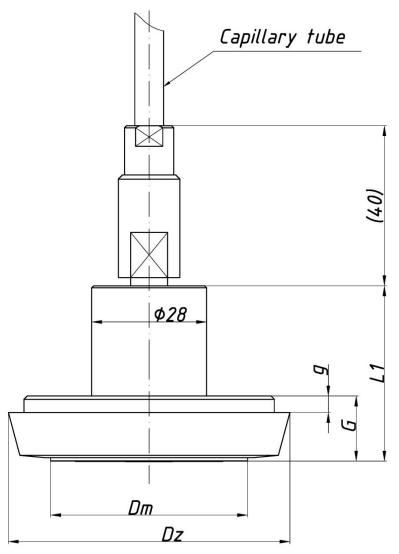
S-K DIN separator with capillary in axis - overall dimensions.
